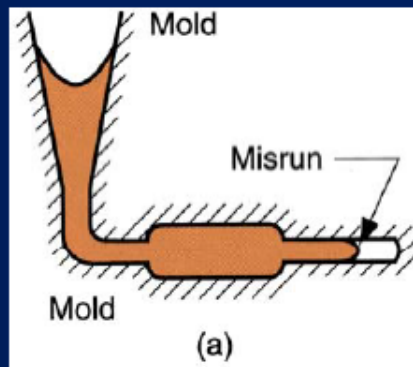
Some common defects in castings: (a) misrun
